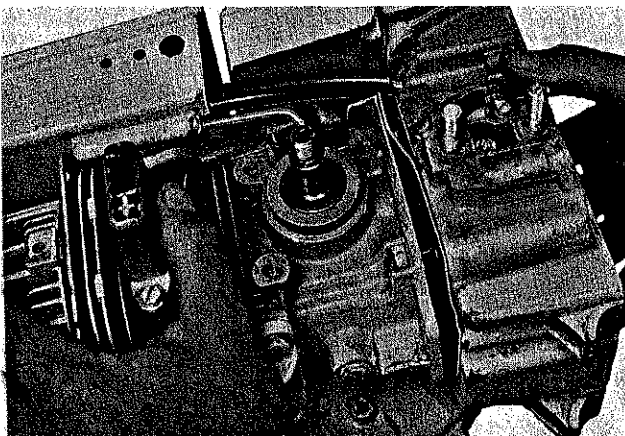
Separating the fuel and oiler tank assembly from the crankcase. The fuel hose pulls off the fuel tank tube. The tube is not removed.
